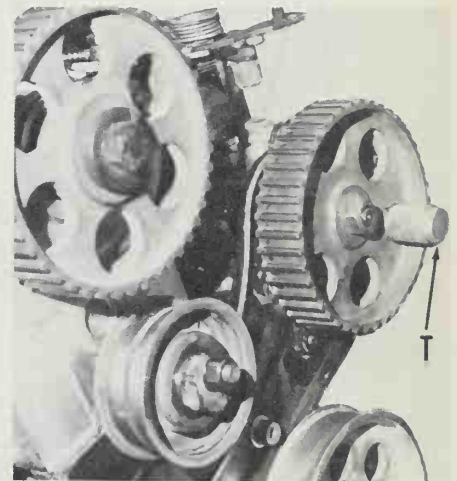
Insert tool 2064 (T) through holes in injection pump sprocket and pump mounting plate.
